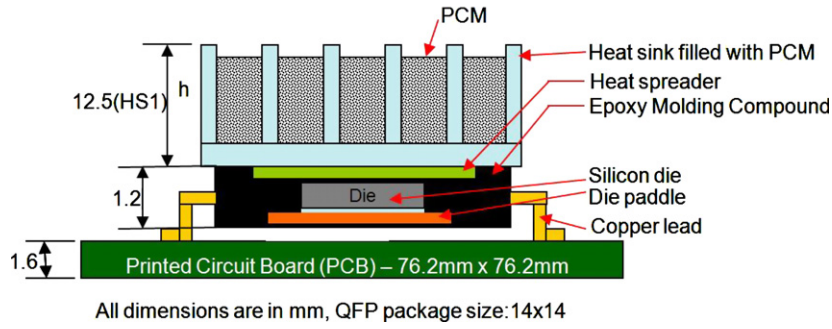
Cross-sectional schematic of PCM filled heat sink with QFP package.
